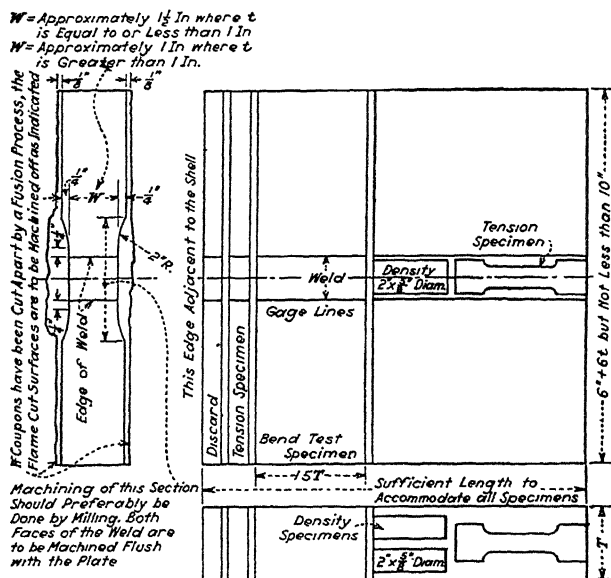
Test specimen from longitudinal welded test plates.
